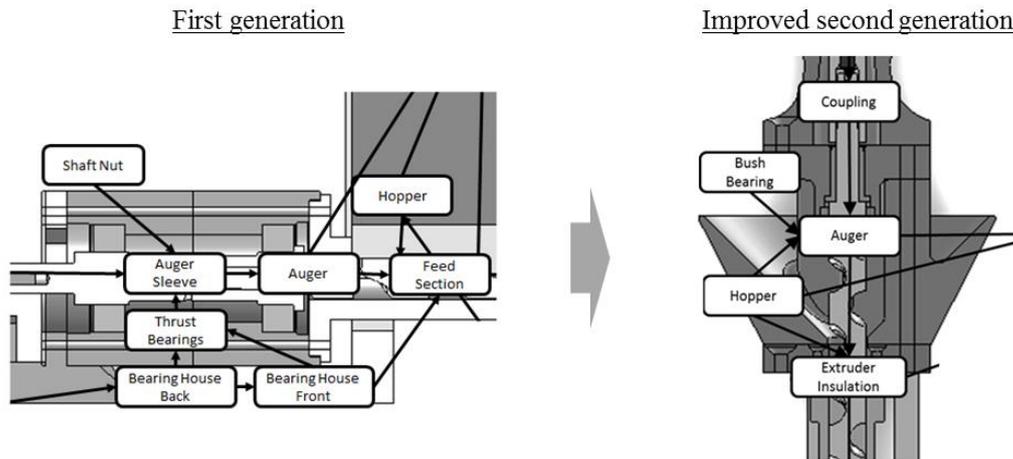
Function models of the bearing unit of the extruder: Auger sleeve with bearing (left); further developed auger sleeve with bush bearing (right)
